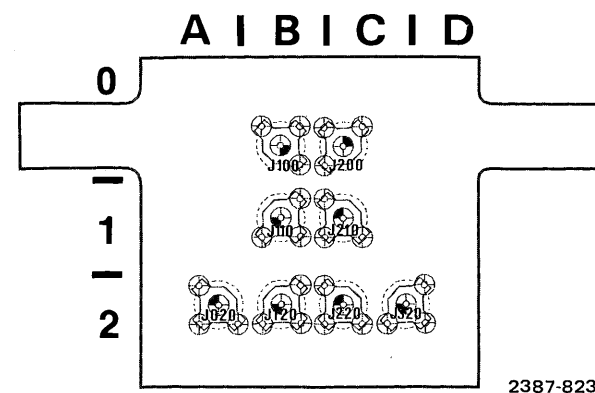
Vertical Interconnect circuit board, assembly A44.
